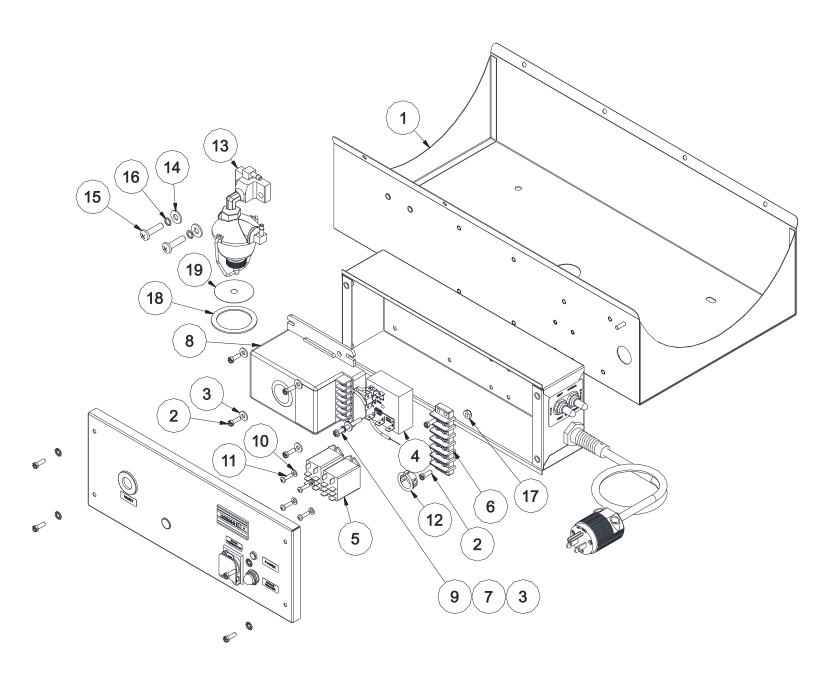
MV60-2CONTROL BOX-FUEL BRACKET ASSEMBLY
